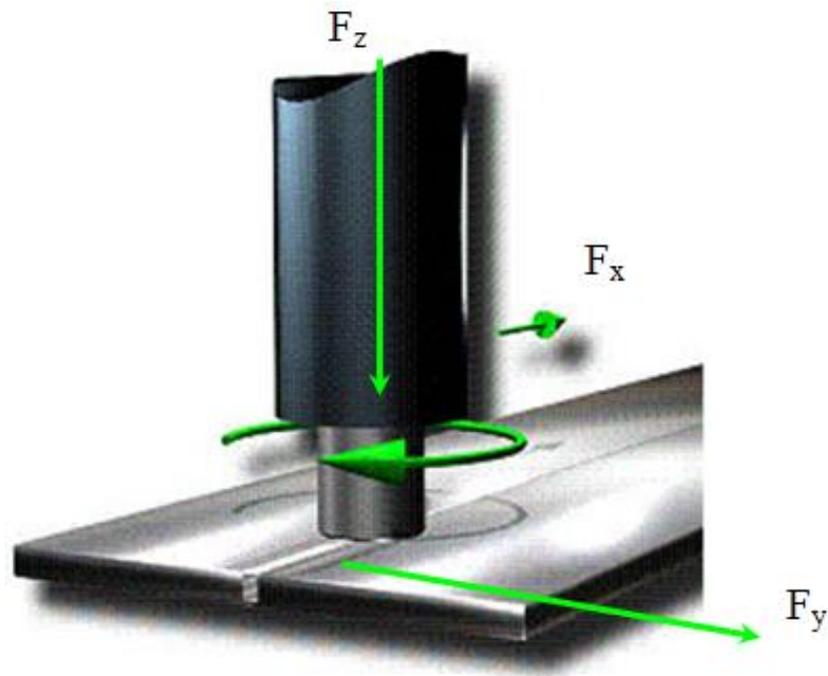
Schematic diagram of friction stir welding and the 3 primary axial loads considered.
